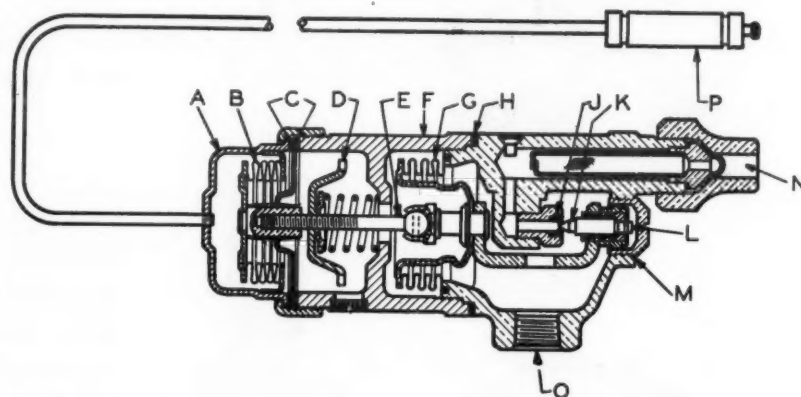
Showing parts of the new Genuine Detroit non-adjustable thermostatic expansion valve: (A) Thermostatic power element, (B) Thermostatic bellows, (C) Moisture tight joint, (D) Factory adjustment, (E) Push rod, (F) Bakelite extension, (G) Pressure bellows, (H) Moisture tight joint, (J) Stainless steel seat, (K) Stainless steel needle, (L) Needle swivel, (M) Plug sealed metal to metal and solder, (N) Inlet connection, (O) Outlet connection, (P) Thermostatic bulb.
